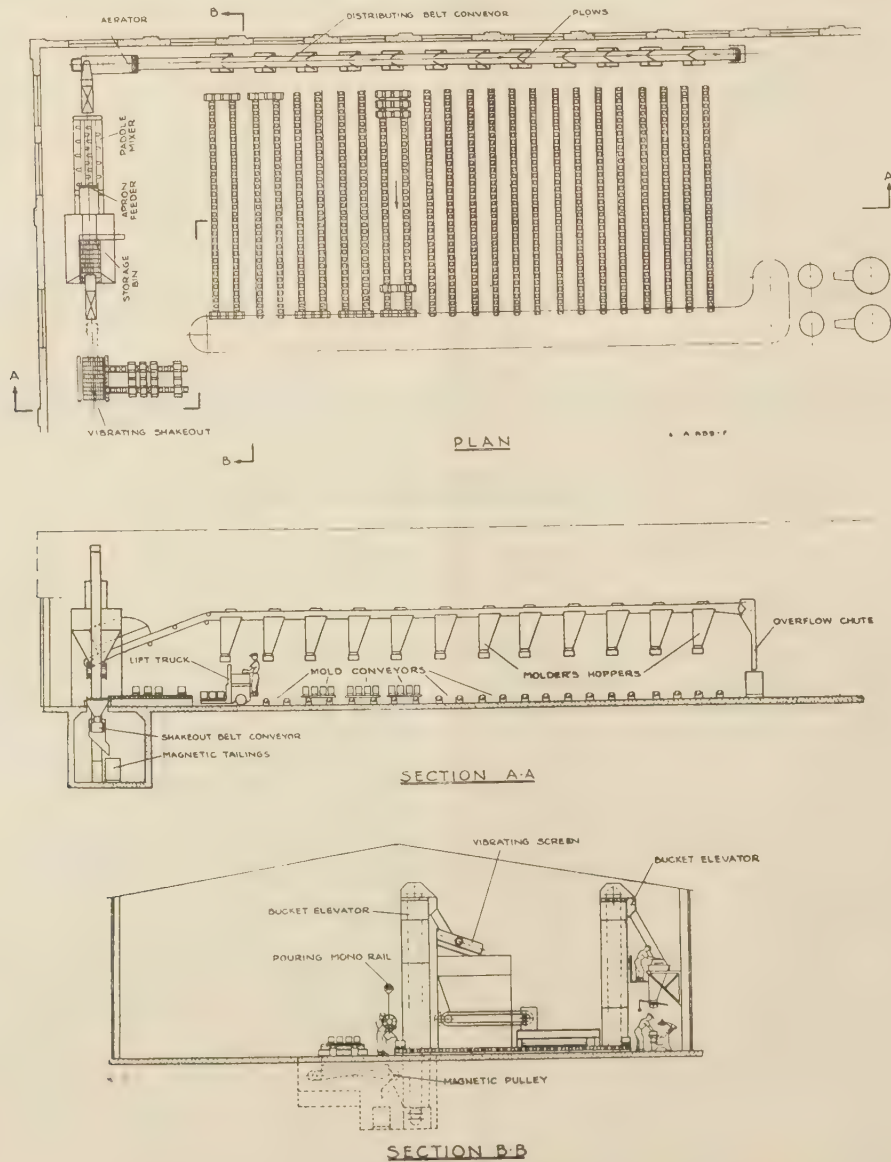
TYPICAL LAYOUT OF FOUNDRY USING ROLLER-TYPE CONVEYER, MOLD STORAGE, AND CENTRAL SHAKEOUT
